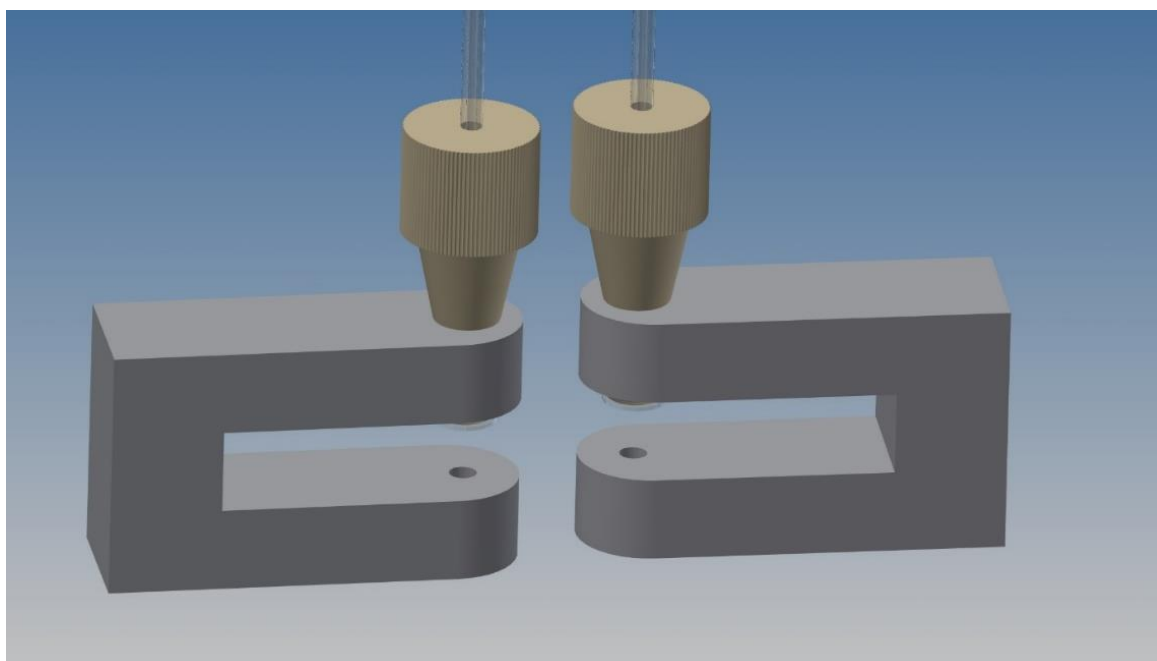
Assembled connector with U-shaped aluminum, PEEK nut, PTFE tubing with flange, and aiming hole used for connecting the chips to fluidics. By tightening the screw, the tubing is pressed against the chip, creating a seal. Connectors were designed in cooperation with principal engineer Inge Mikalsen.
